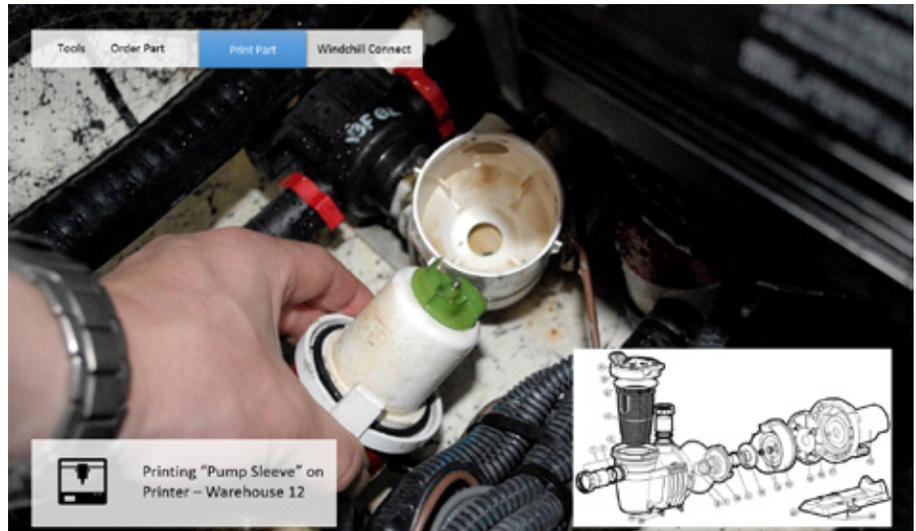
AR view of part with exploded diagram and 3D print request being initiated
